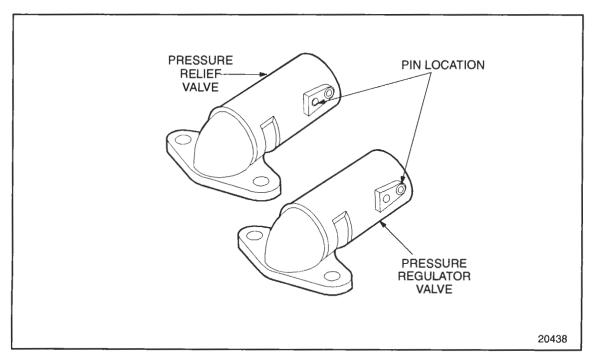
Comparison of Pressure Regulator and Relief Valve Assemblies
